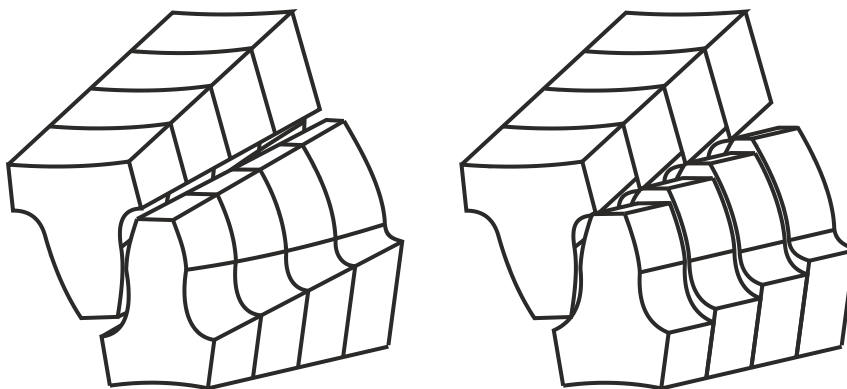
Beveloid gear set (left), substitution with disks of cylindrical involute spur gears (right)
